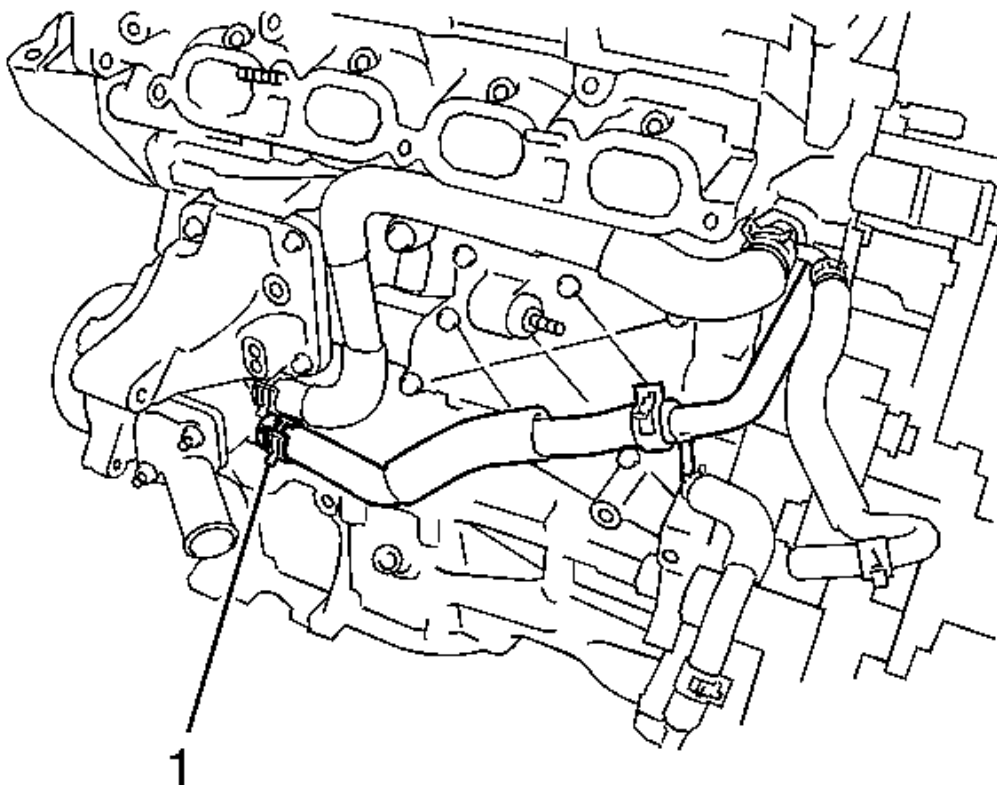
Identifying By-Pass Hose & Water Inlet Housing
